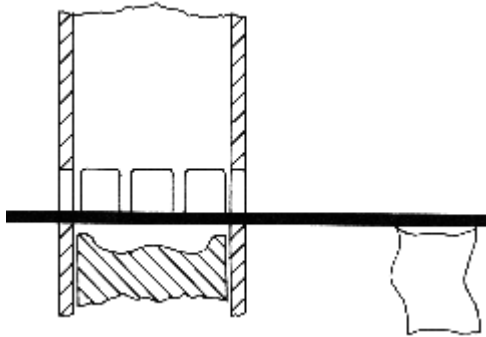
"Stop-Bar" Inserted Through Cylinder Ports
